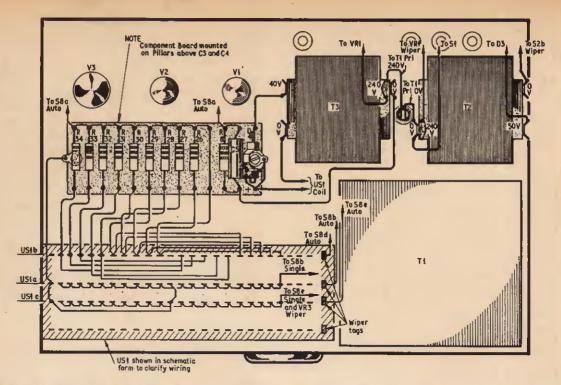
Top side wiring of the chassis. Each dash on the uniselector represents an outlet tag; the wiper is at the right hand end and coil connections underneath (not visible here). The uniselector is mounted on pillars above the chassis. C3 and C4 are underneath the group board. This drawing appears half scale
